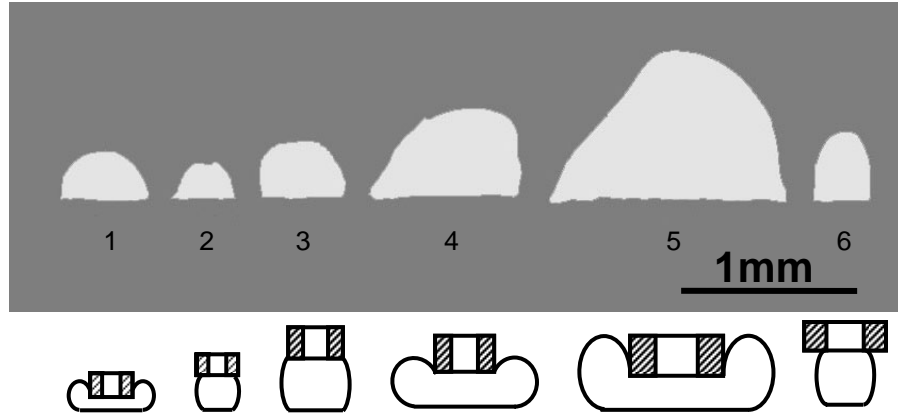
Enlarged optical images showing single-thread cross sections and the schematic drawings showing the predicted cross sections, respectively.
